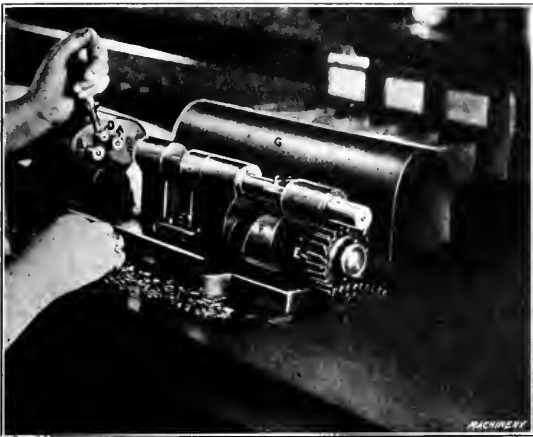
Special Machine used for assembling Odometer Gear Clusters
